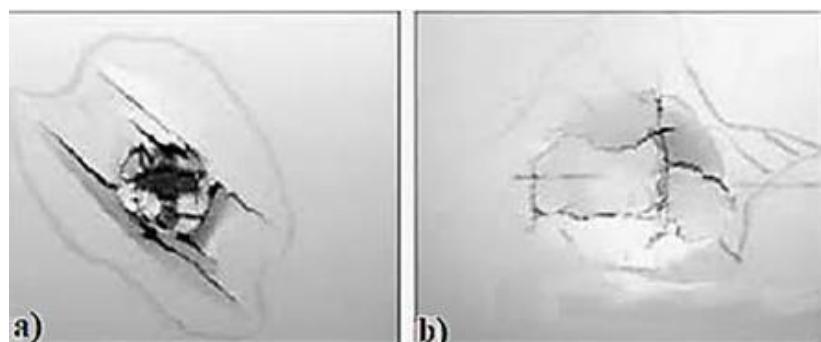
External damage of composite materials: a) on the surface of the wing; b) in the fuselage [3]
